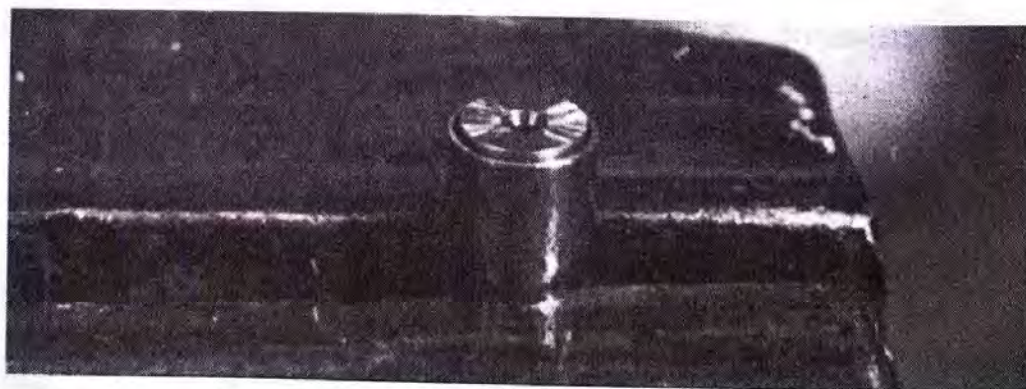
Liner ONLY in padded vise jaws, chambering reamer in place.
